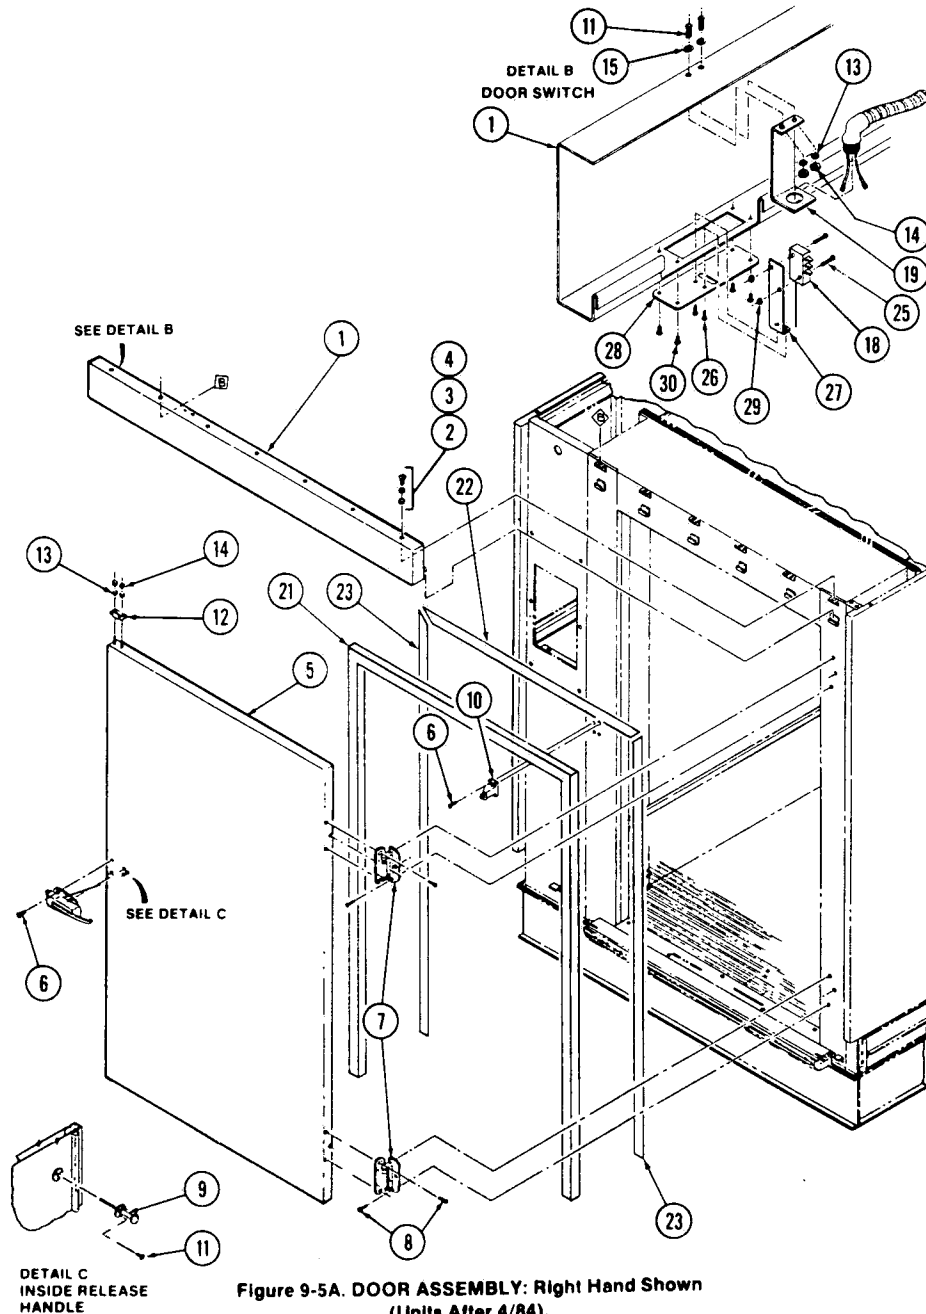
A. DOOR ASSEMBLY: Right Hand Shown
